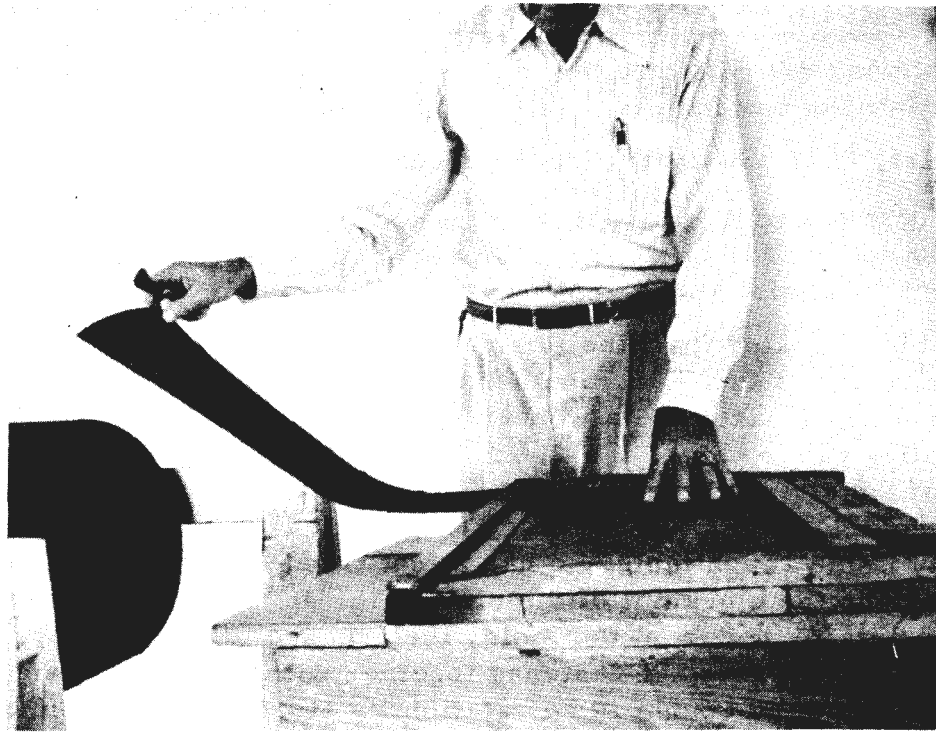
The 3-foot strip of roofing paper inserted into the cutting board ready to be cut into 12- x 12-inch pieces.
